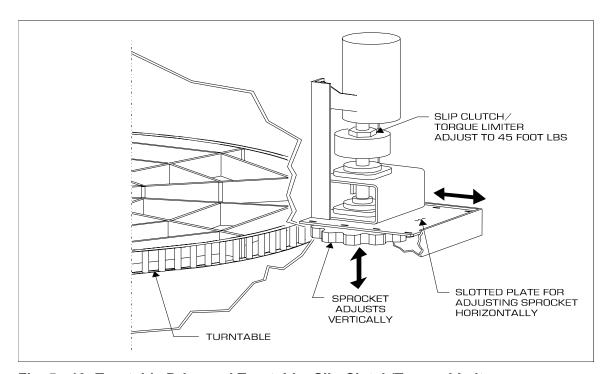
10: Turntable Drive and Turntable: Slip Clutch/Torque Limiter
